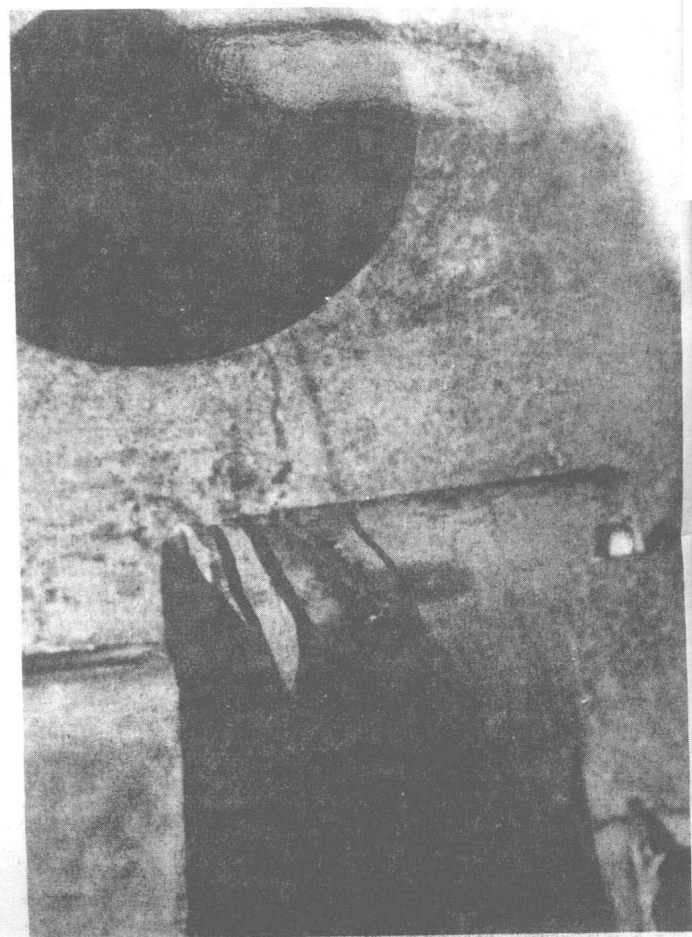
View of Turbine Shell Casting Illustrating Both Old Casting Defects and Sharp Internal Radii.
